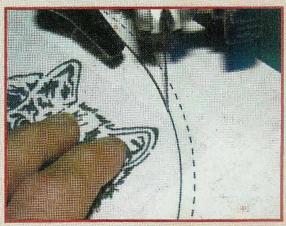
Scroll out the inner edge of the frame, following the solid line.
